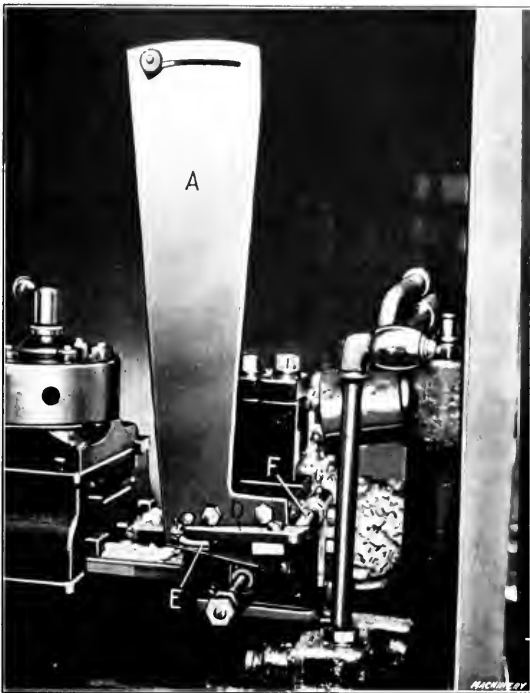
Rear View of Diameter Indicator Stop showing how it is operated
